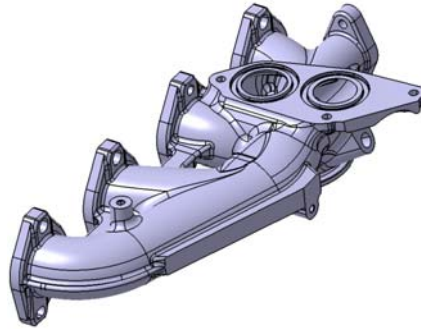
Typical exhaust manifold of 4-cylinder diesel passenger car engine.
